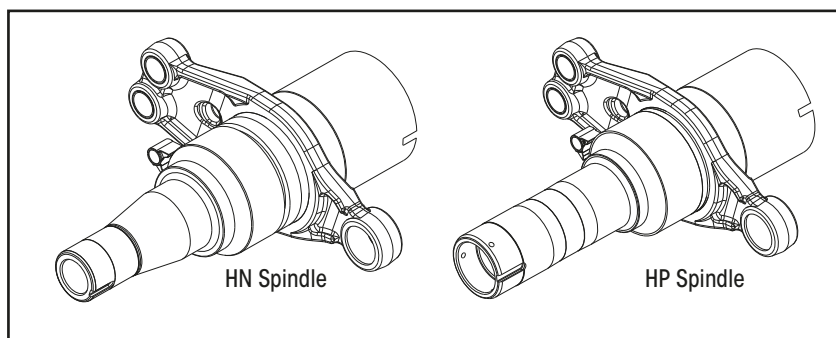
HN Tapered Spindle and HP Parallel Spindle
